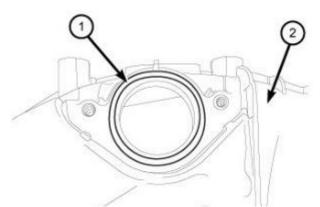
Upper EGR Tube O-ring at Intake Manifold
